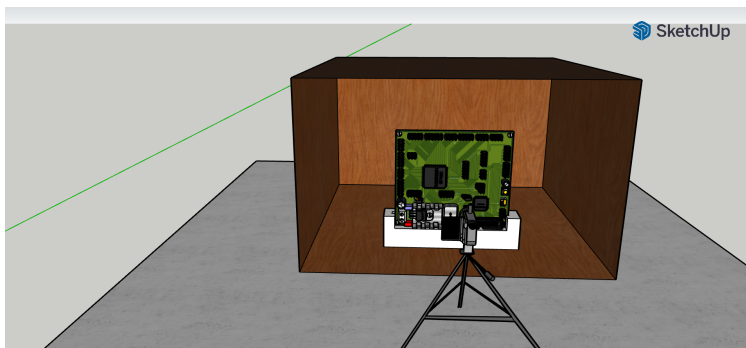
Fully Automated Smart Inspection System (Side View)
